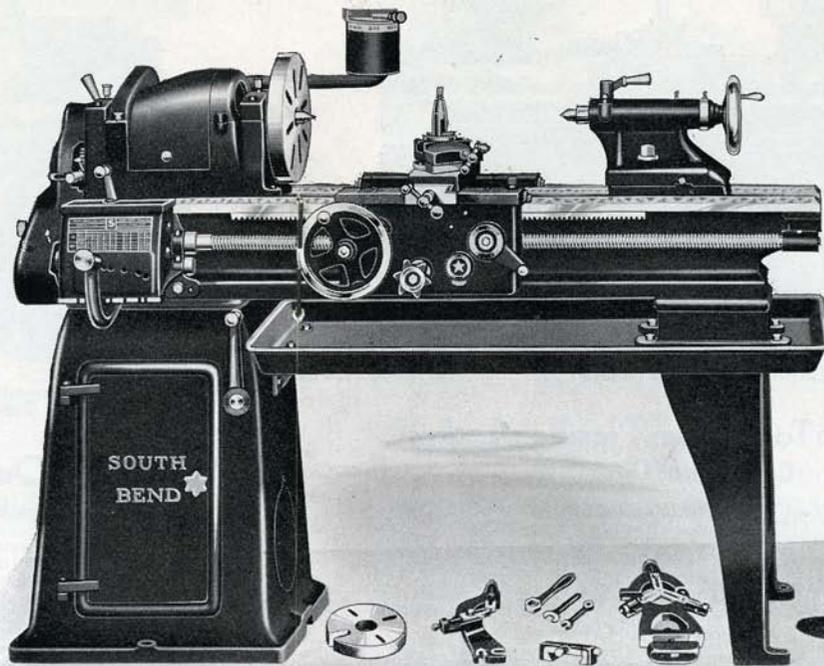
13'' x 5' South Bend Underneath Belt Motor Driven Precision Lathe with Chip Pan, as shown.....\$602.00, without Chip Pan.....\$575.00.
